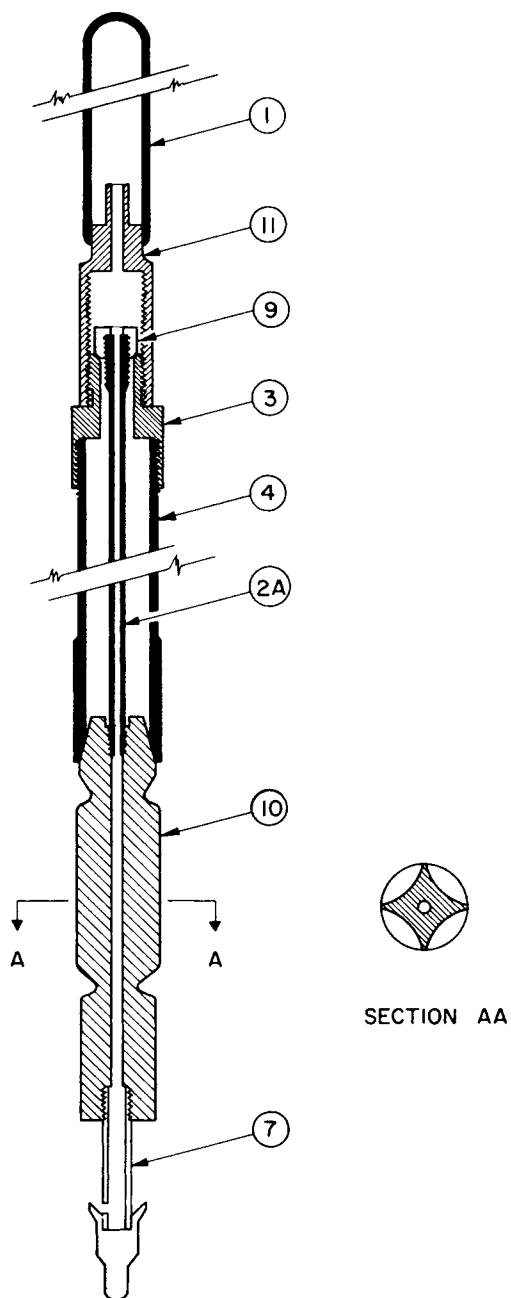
Two-bob assembly for making $\frac{1}{2}$ -in.-diameter tubular membranes: (1 to 8) same as for Fig. 2; (9) retainer and pivot ring; (10) centering fins and casting bob (Teflon); (11) air inlet and cap.
